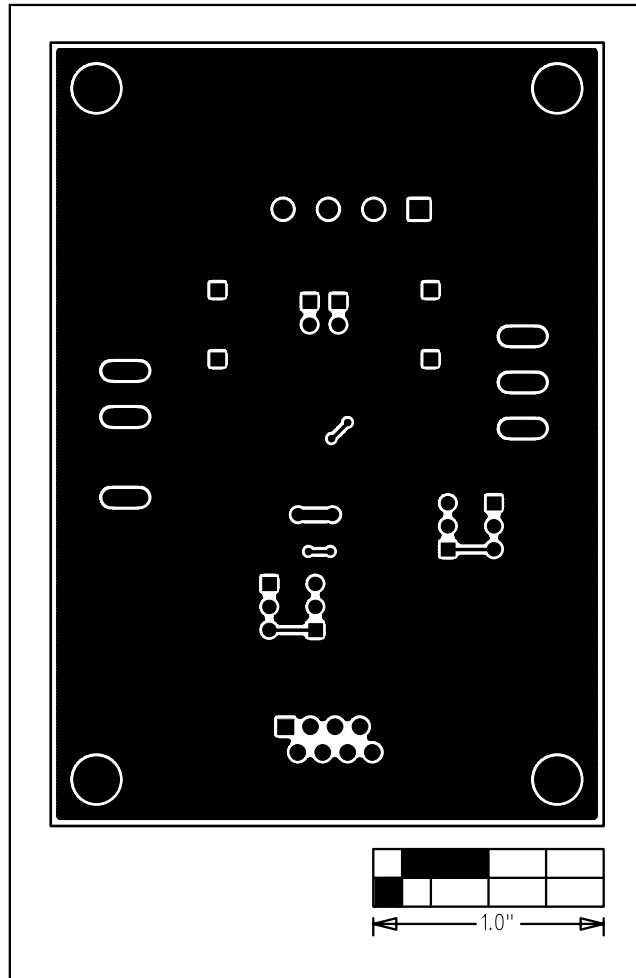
MAX3161E EV Kit PCB Layout—Solder Side
